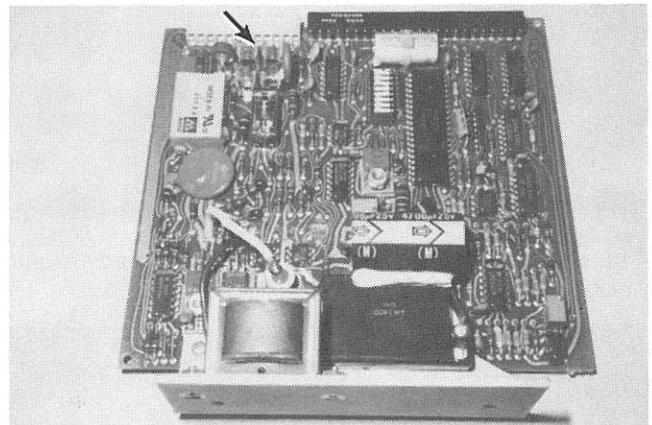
Power Supply Card (No. 1) HVAC Blend Door Actuator Motor Fuse Location
